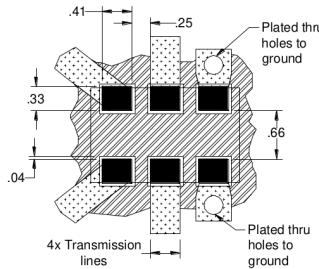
DC4759J5020AHF recommended PCB layout.
